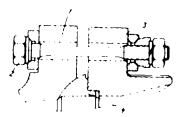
Connection of the Combustion Chamber Orifice With the Air Adapter
